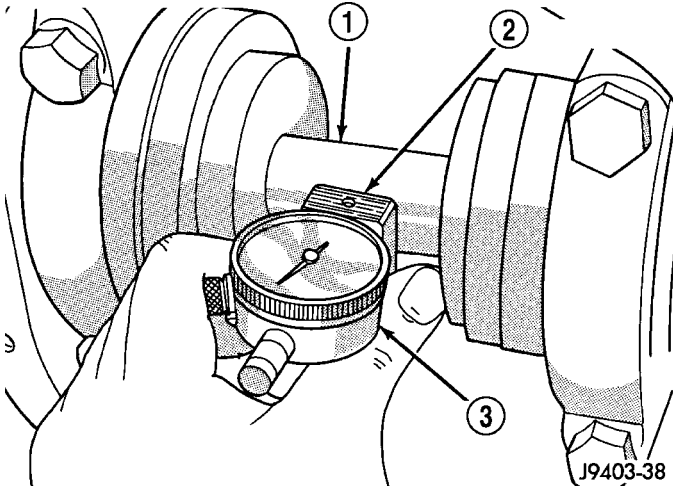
PINION GEAR DEPTH MEASUREMENT
